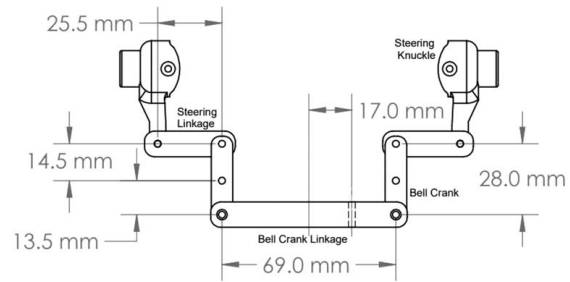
Custom rear-wheel steering assembly annotated drawing
